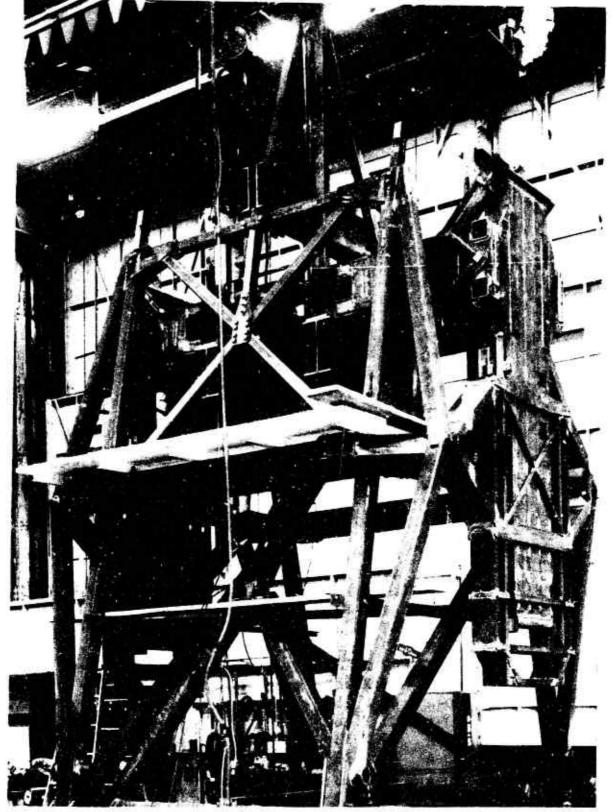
Landing Gear Support Fixture Structural Proof Test For Landing Load Condition
